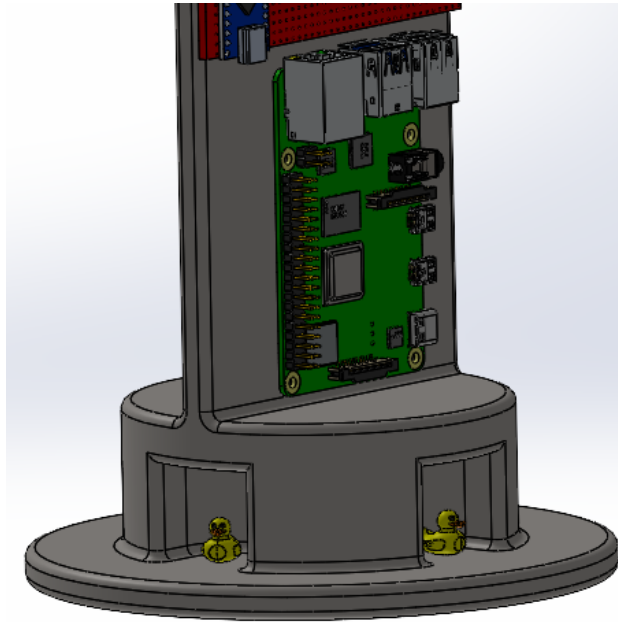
CAD model of Nose Cone mounted STEMCRaFT showing STEMnaut housing and electronics sled.
